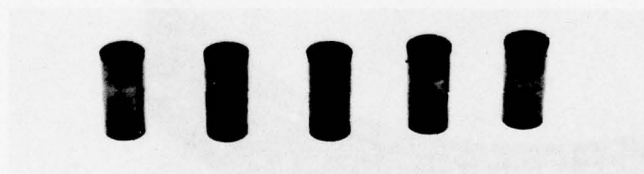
Condition of Bearing Components After Oil Starvation Test - 86 Seconds Without Oil
